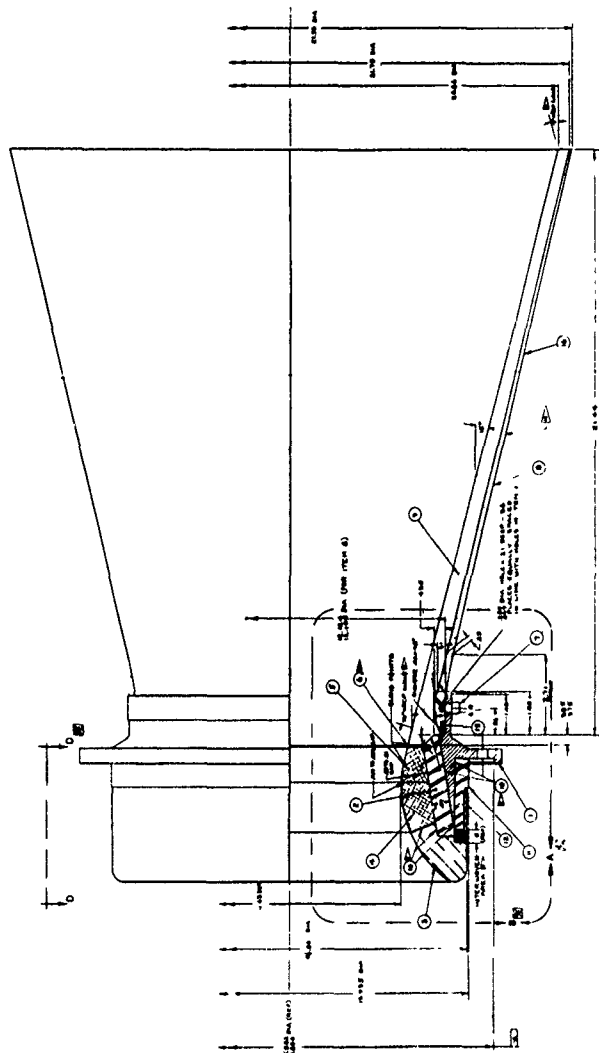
Preliminary TU-290 Nozzle Design Drawing 9U34081 (Page 2 of 2)
